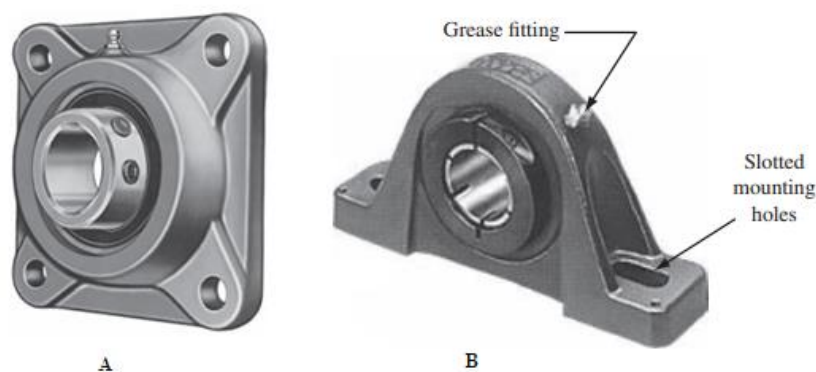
4-Bolt flange bearing (A) and radial ball bearing (Robert L.Norton, 2006).
